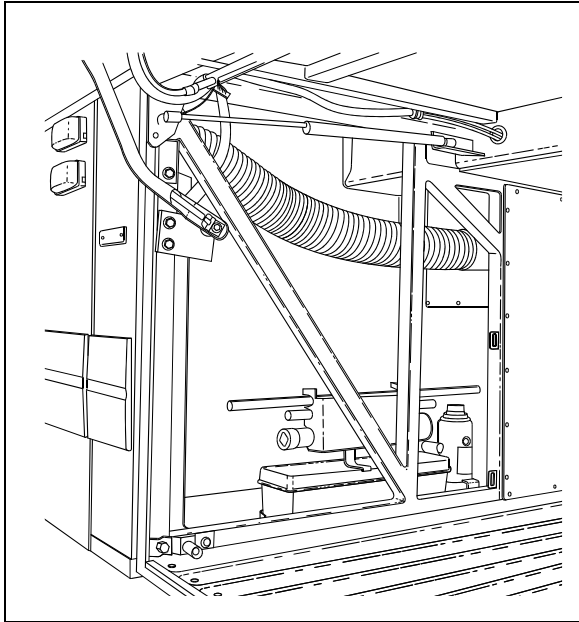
REAR BAGGAGE COMP. L.H. SIDE
